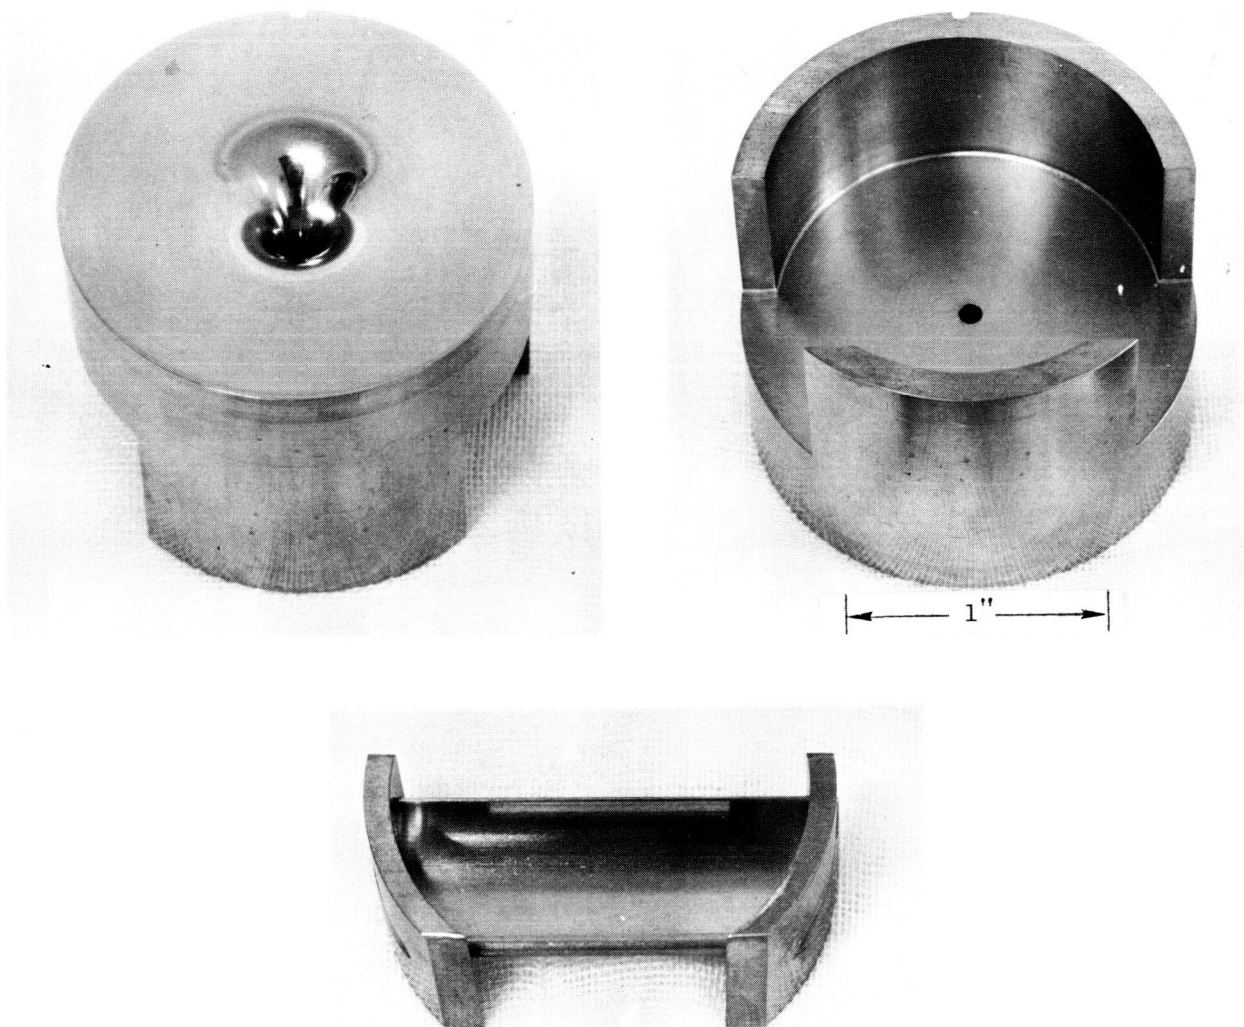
Entrance and exit side of nozzle and blade assembly of second stage (Mo-TZC) of turbine simulator.
